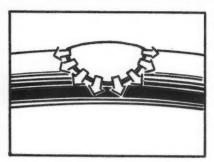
Localized heating of a bar as in arc welding.
